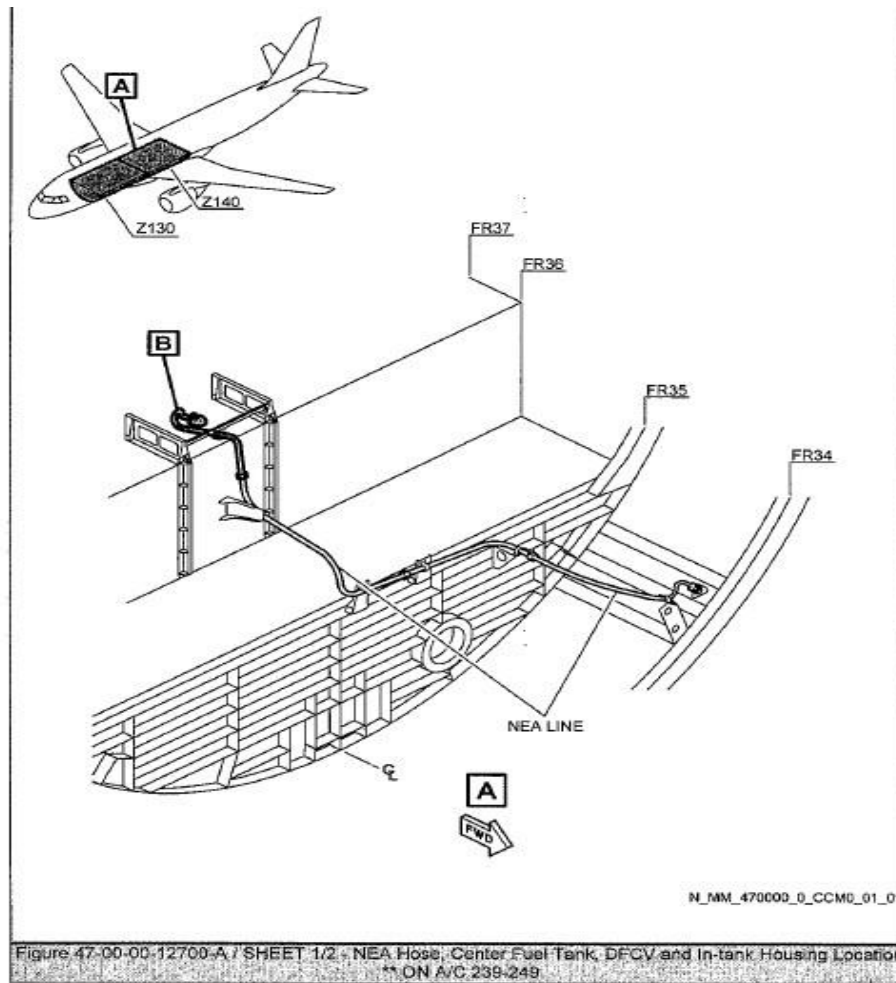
A, SHEET 1/2 - NEA Hose, Center Fuel Tank, DFCV and In-tank Housing Location
